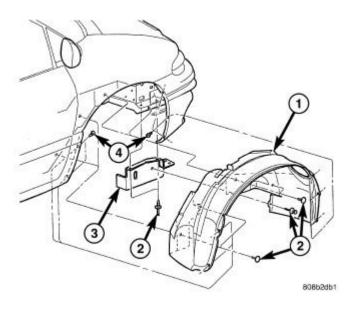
Left & Right Front Inner Fender Well Courtesy of CHRYSLER LLC
